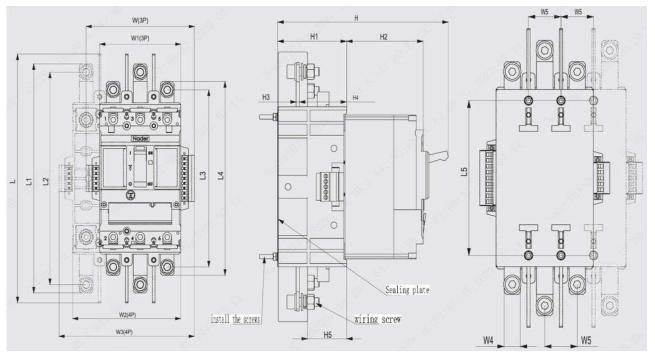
3P、 4P Outline and installation dimensions of plug-in board front wiring Table 19 The overall dimensions of plug-in board front wiring (horizontal) and circuit breaker after
